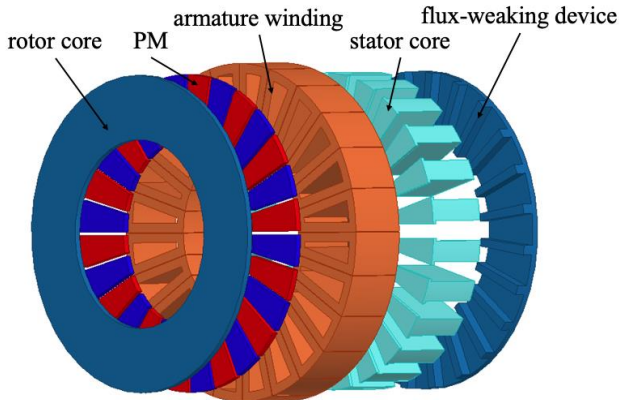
Explosion diagram of an axial flux permanent magnet machine with a mechanical flux-weakening device.
